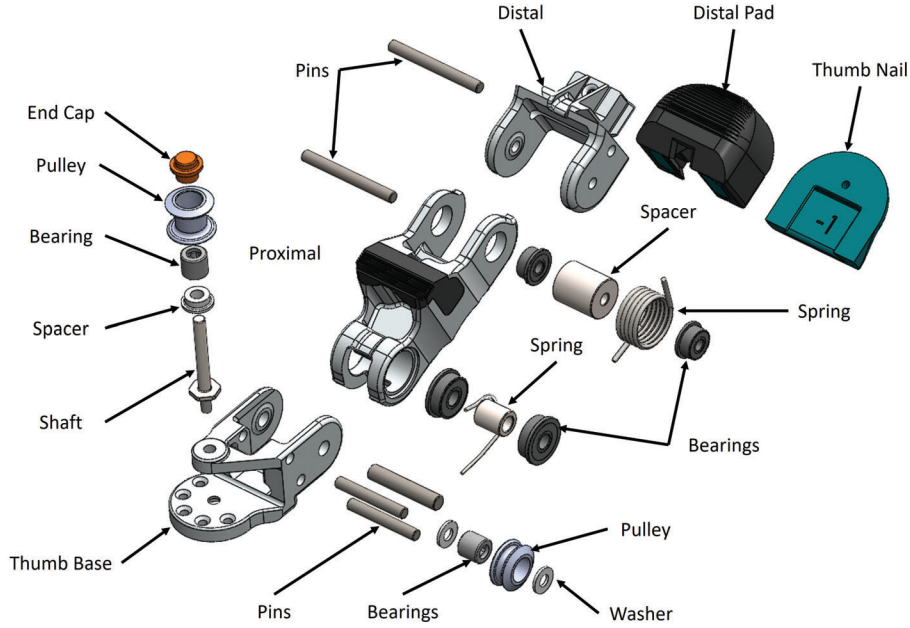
An exploded view construction of the thumb. Modular distal pad and thumb nail allows the tip of the finger to be easily altered. Bearings are used to reduce friction in the joint and torsional springs provide passive extension. Pulleys within the thumb reduce friction and enable rerouting of the thumb tendon.
